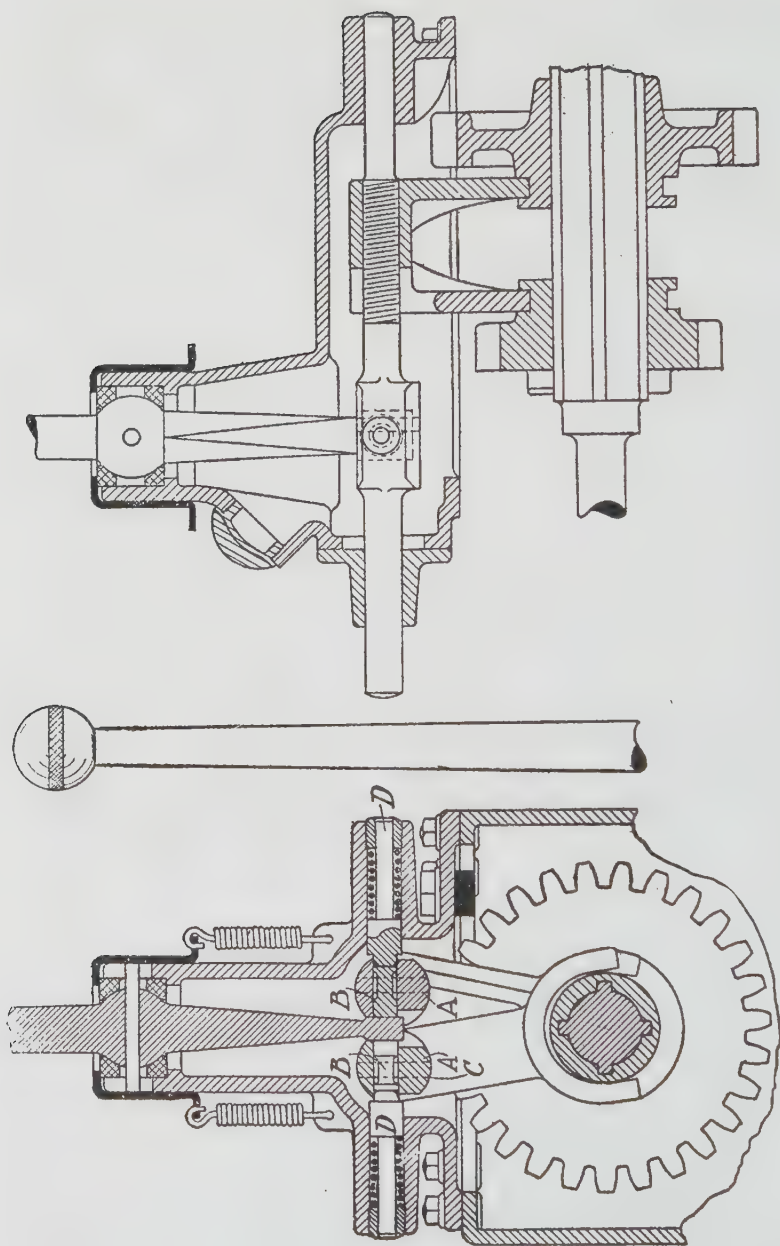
BALL MOUNTED CONTROL LEVER (Reo).
